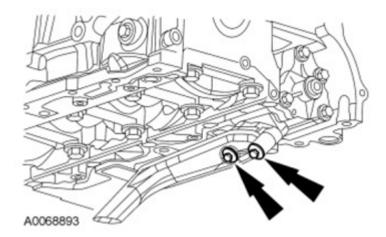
Locating Bolts, Oil Pump Pickup Tube And Gasket Courtesy of FORD MOTOR CO.
